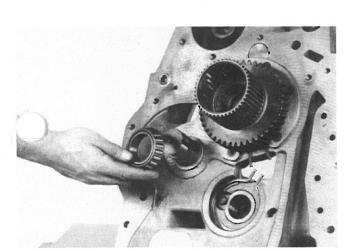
Install inner taper bearing on shaft with large diameter of taper down.
